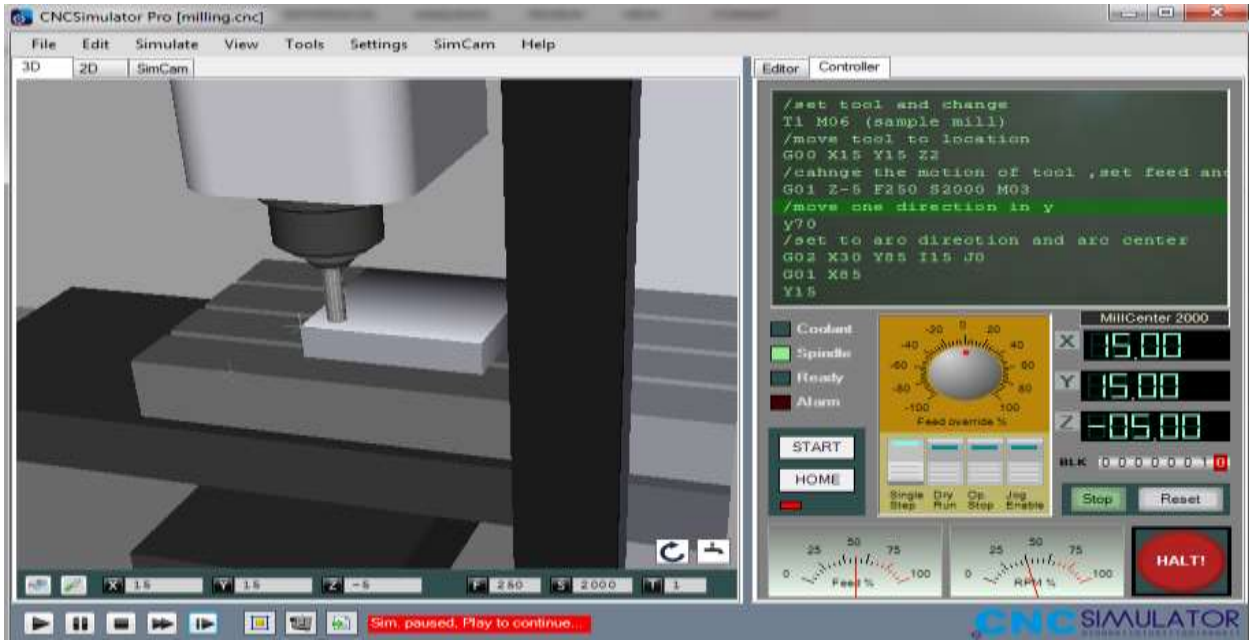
Changing the motion of the tool and setting the feed and spindle
